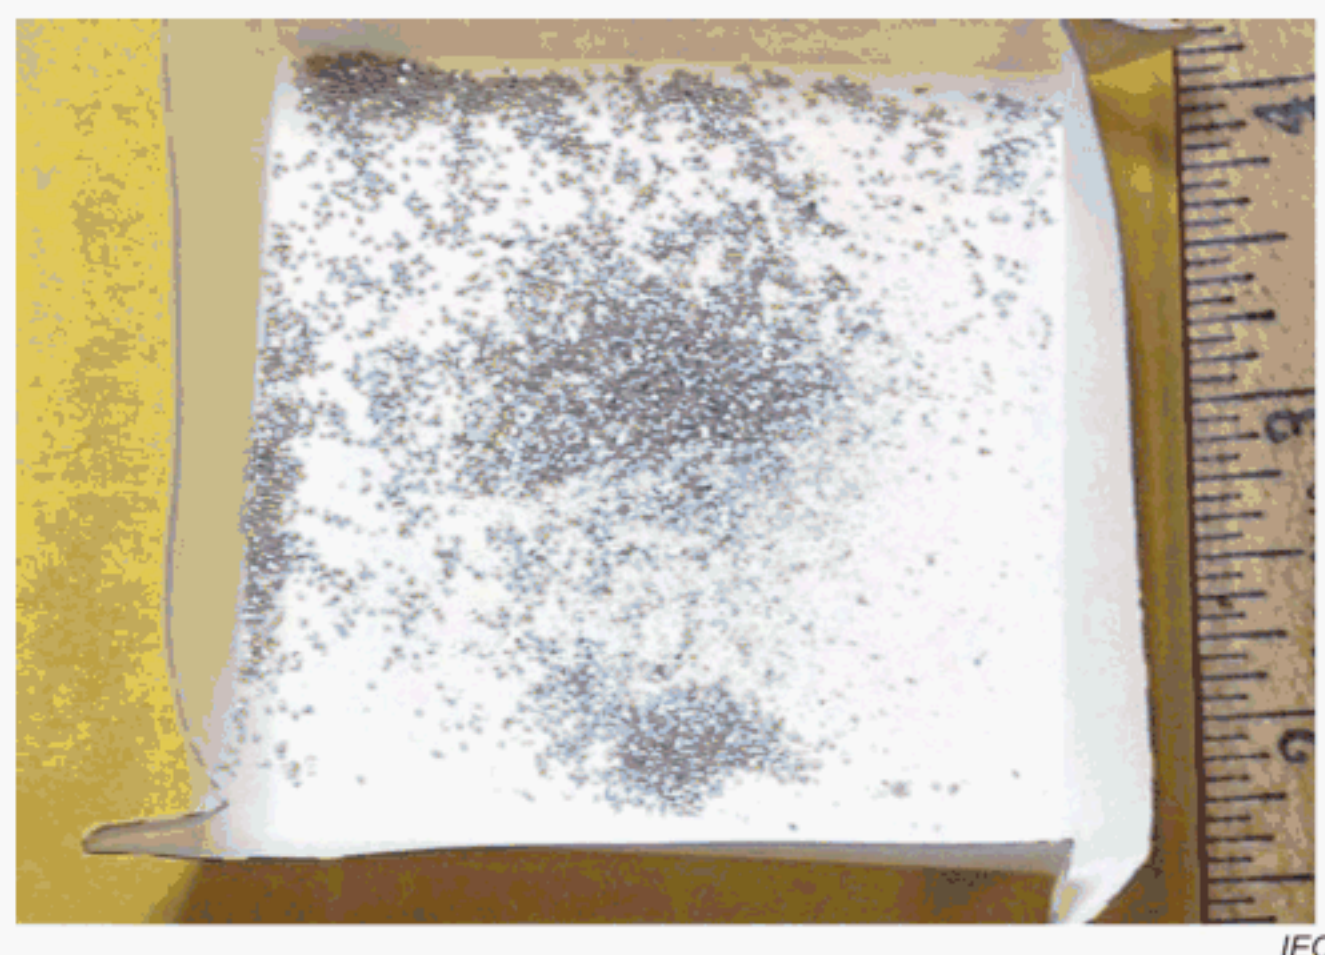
Solder ball material collected from BGA using hand removal procedure
